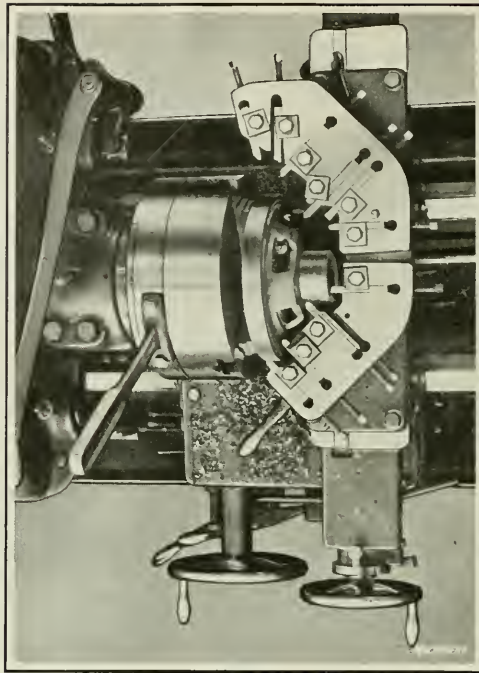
Turret Lathe with Equipment used in the First Chucking Operation on the Differential Housing
